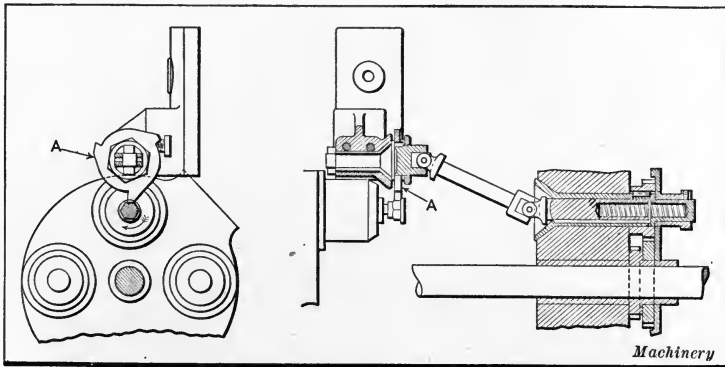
Attachment for Milling Squares and Hexagons while Work is Revolving for Other Machining Operations
